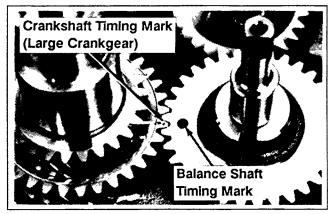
Aligning Timing Marks On Crankgear and Balance Shaft Gear.
